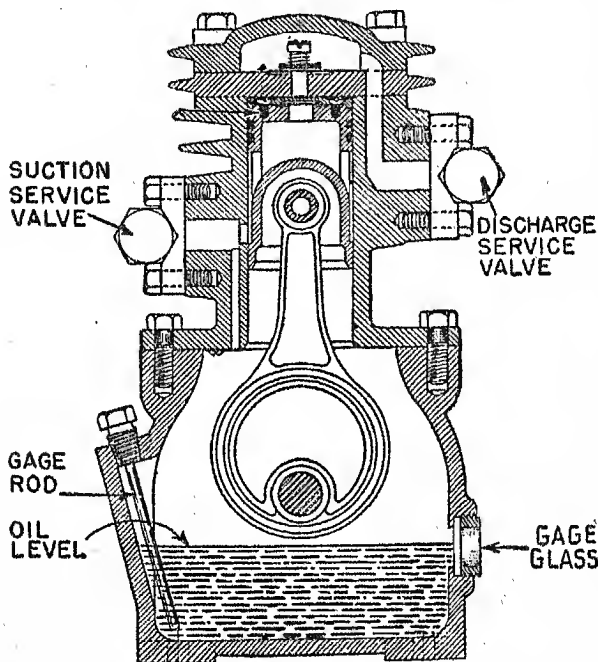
Oil Level Gage Rod and Sight Glass or Bull's-eye in Compressor Crankcase.
